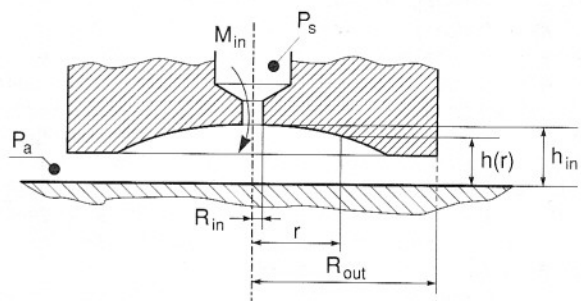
Cross-sectional view of a bearing with a nonuniform clearance
